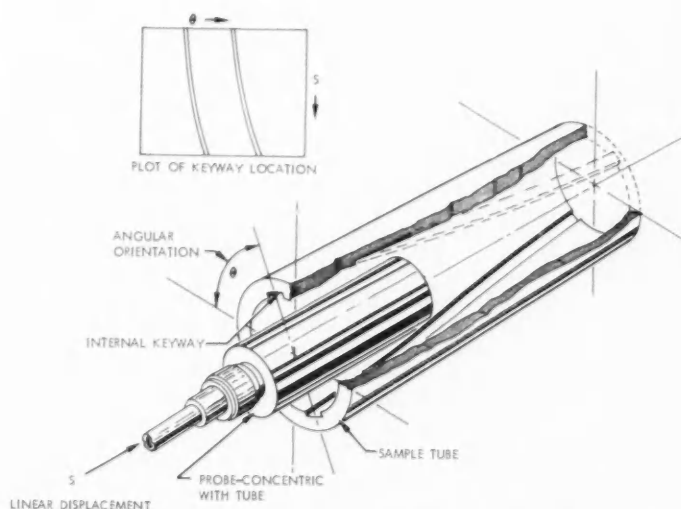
Internal machine cut is inspected for width, depth, and position of cut by probe assembly with collimated focus at right angle to the axis.
